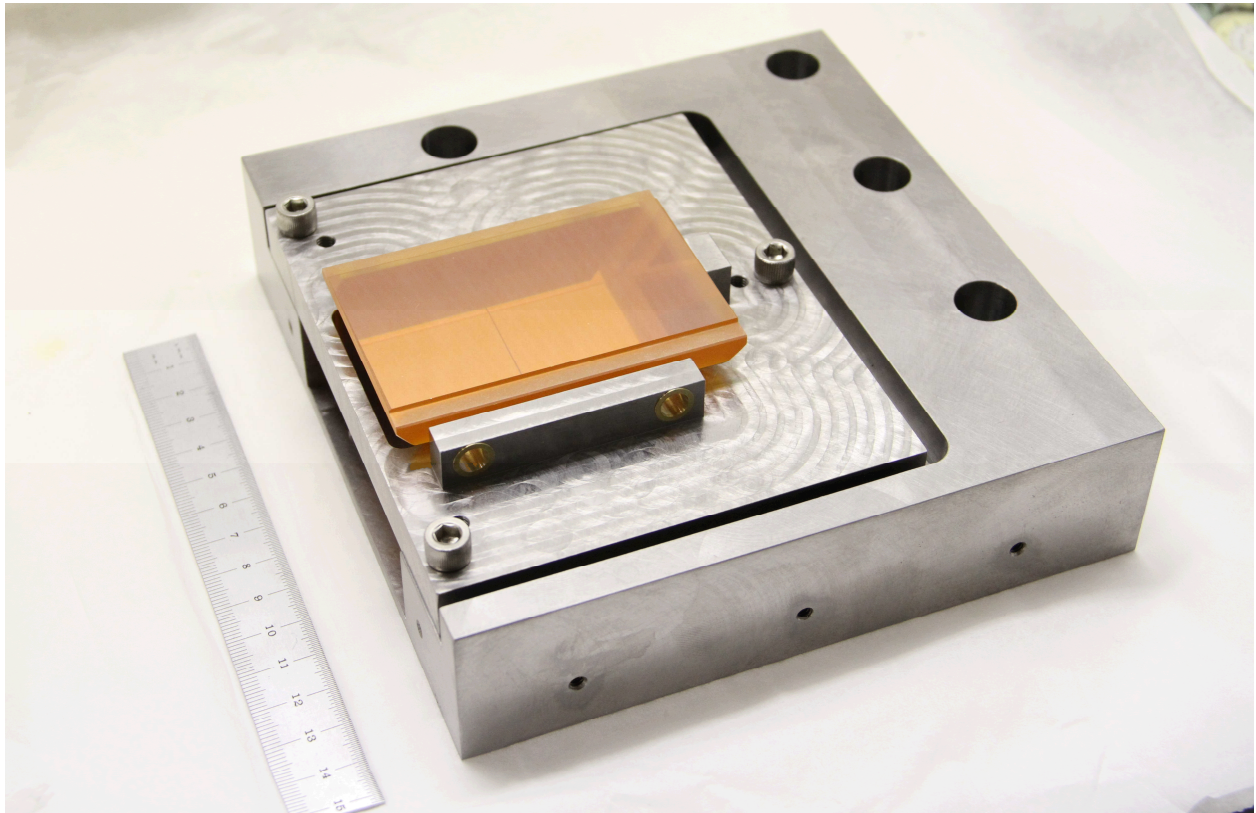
Photograph shows an HK grism blank installed in the low carbon steel machining fixture. A common base is used for both grisms. Only the support insert is changed.
